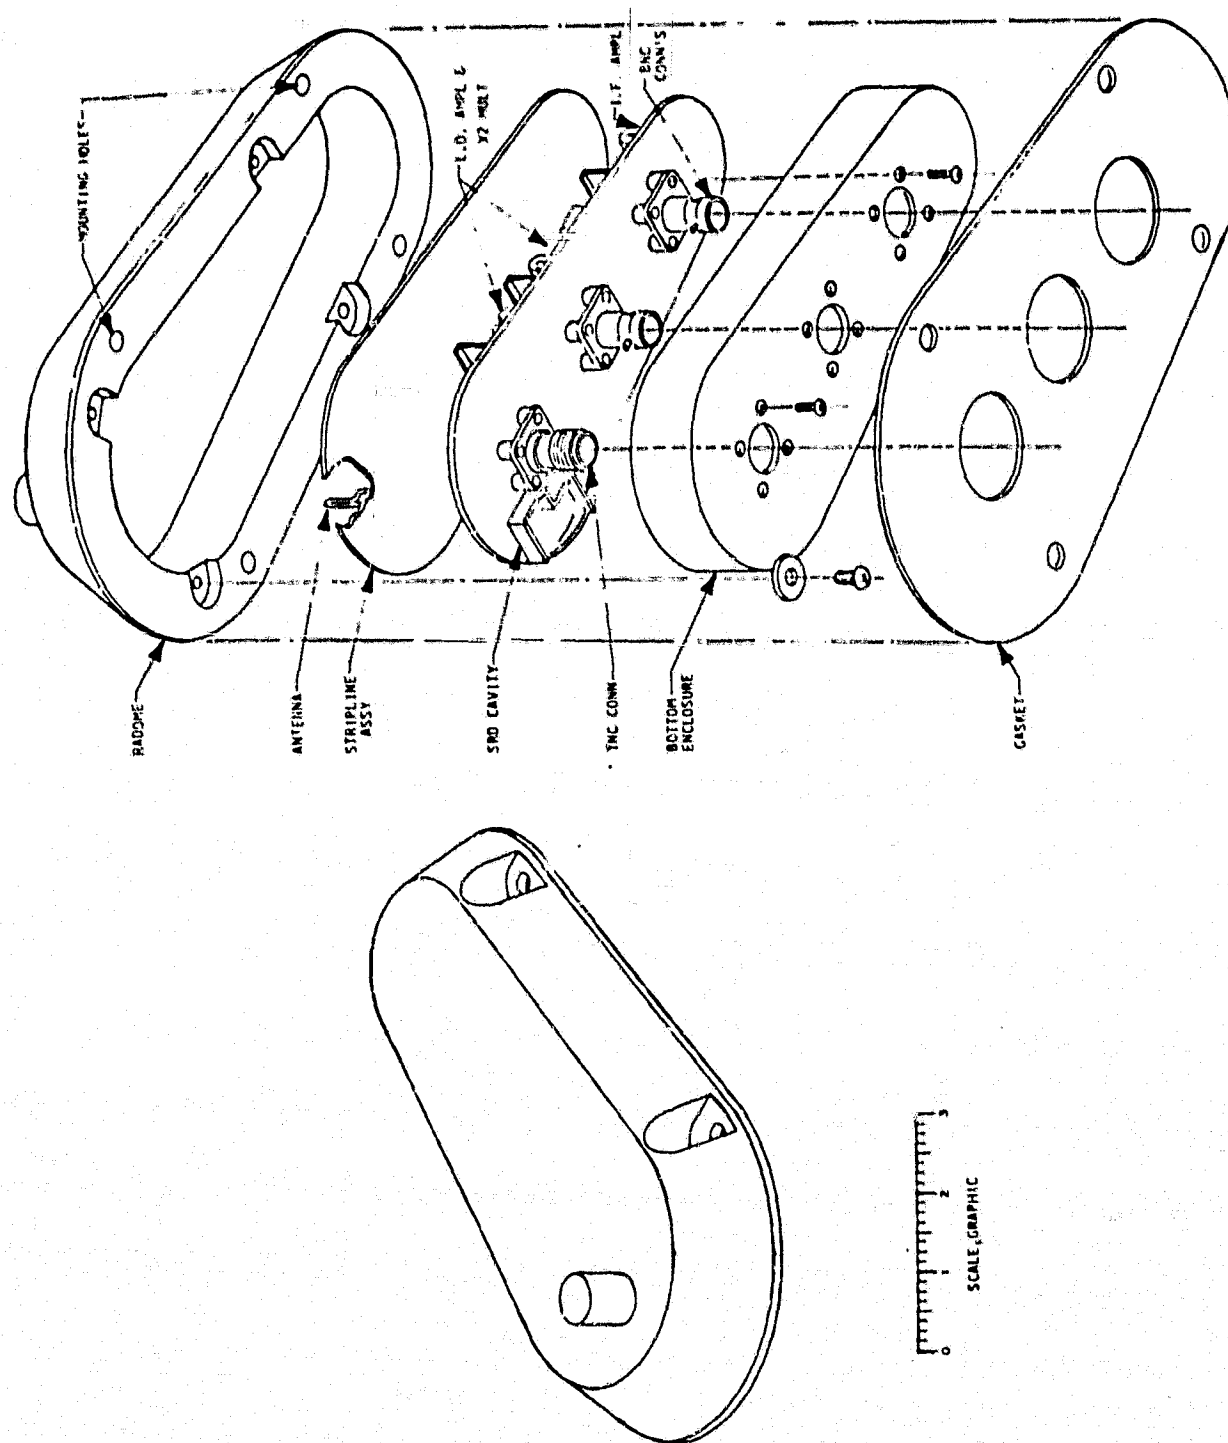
DETAILED BREAKAWAY DRAWING OF RF HEAD FIGURE
